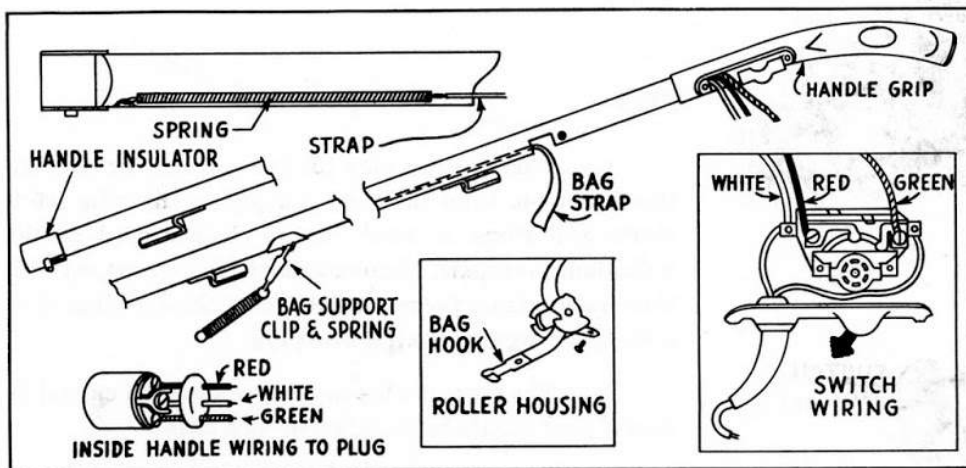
Handle with two-speed switch and enclosed bag support mechanism
